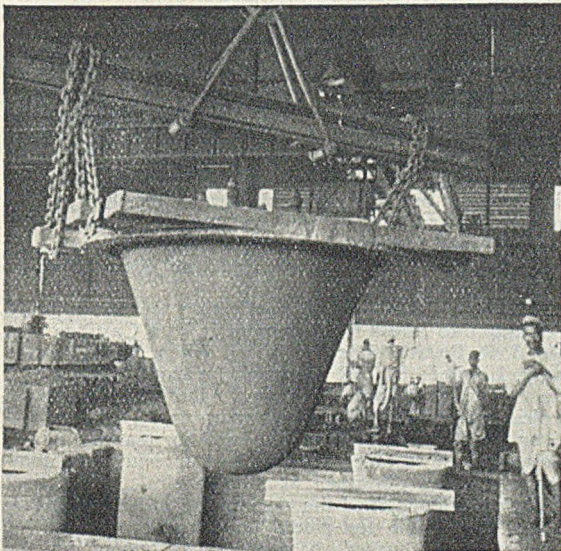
TOP PART OF A MOULD FOR A SLAG LADLE BEING LOWERED INTO THE CASTING PIT.
